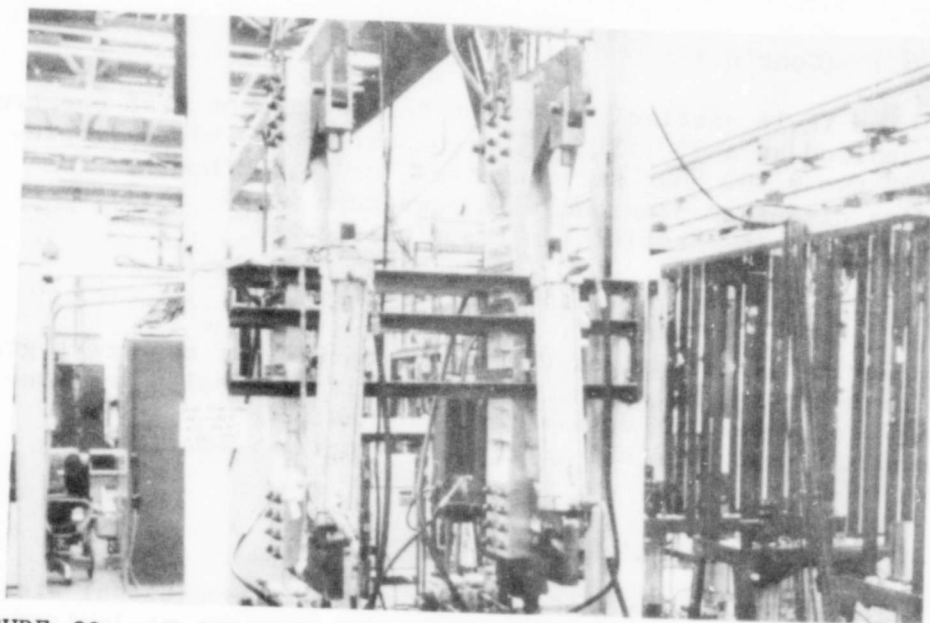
F-111 REAR SPAR SPECIMENS IN FATIGUE TEST FIXTURE
